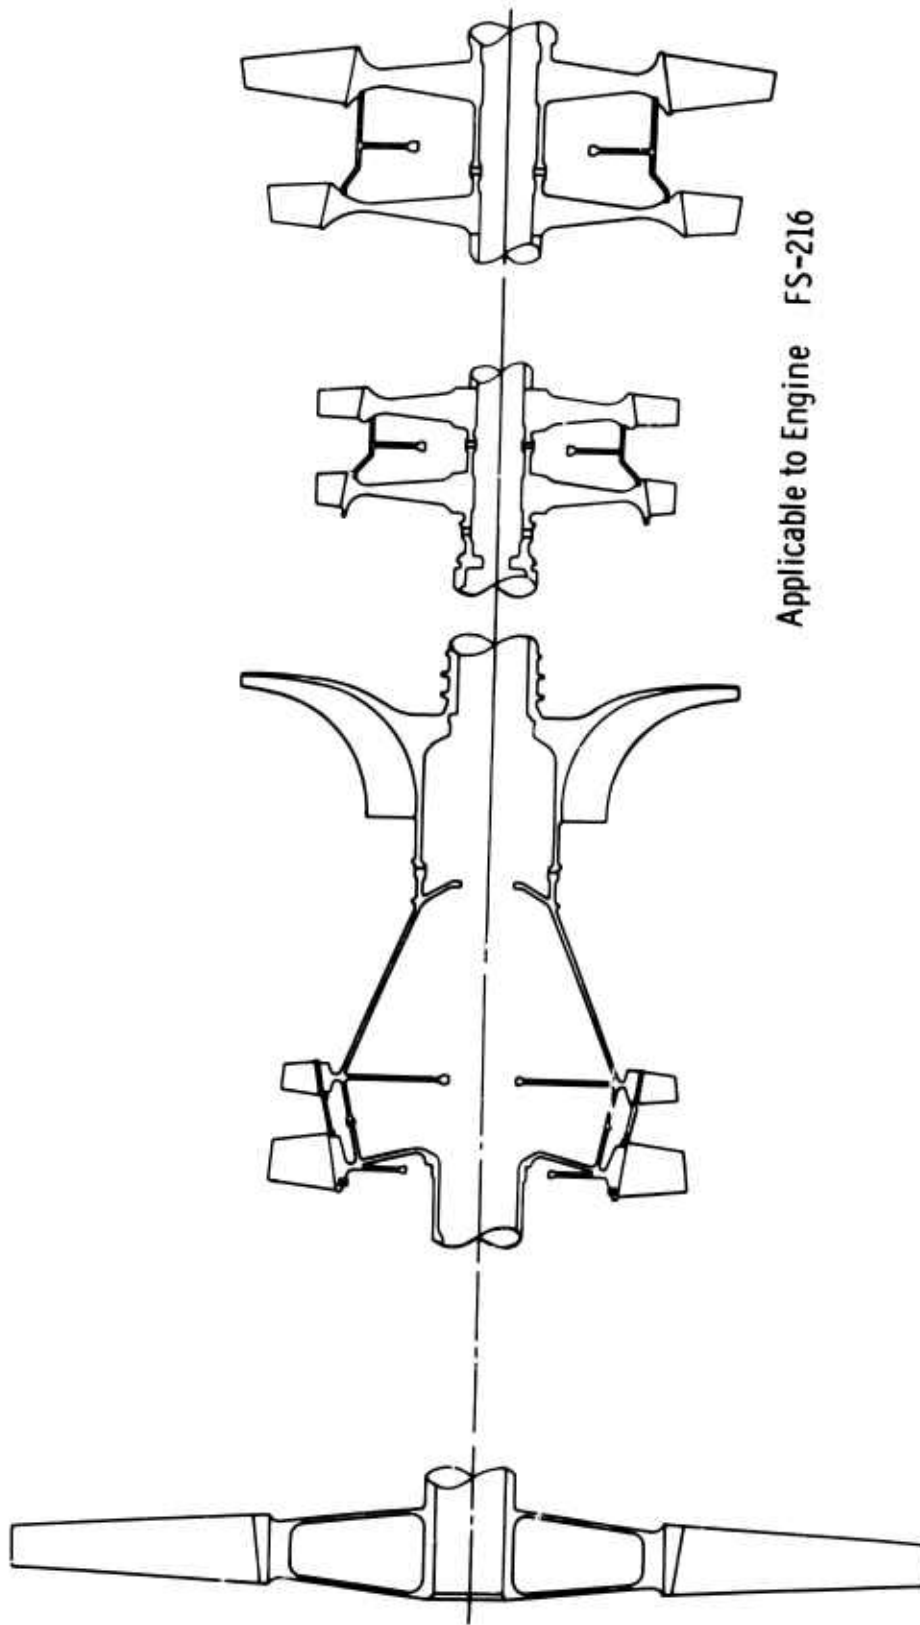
Rotor System for 16.0:1 - Pressure-Ratio Shaft - Power Engine.
